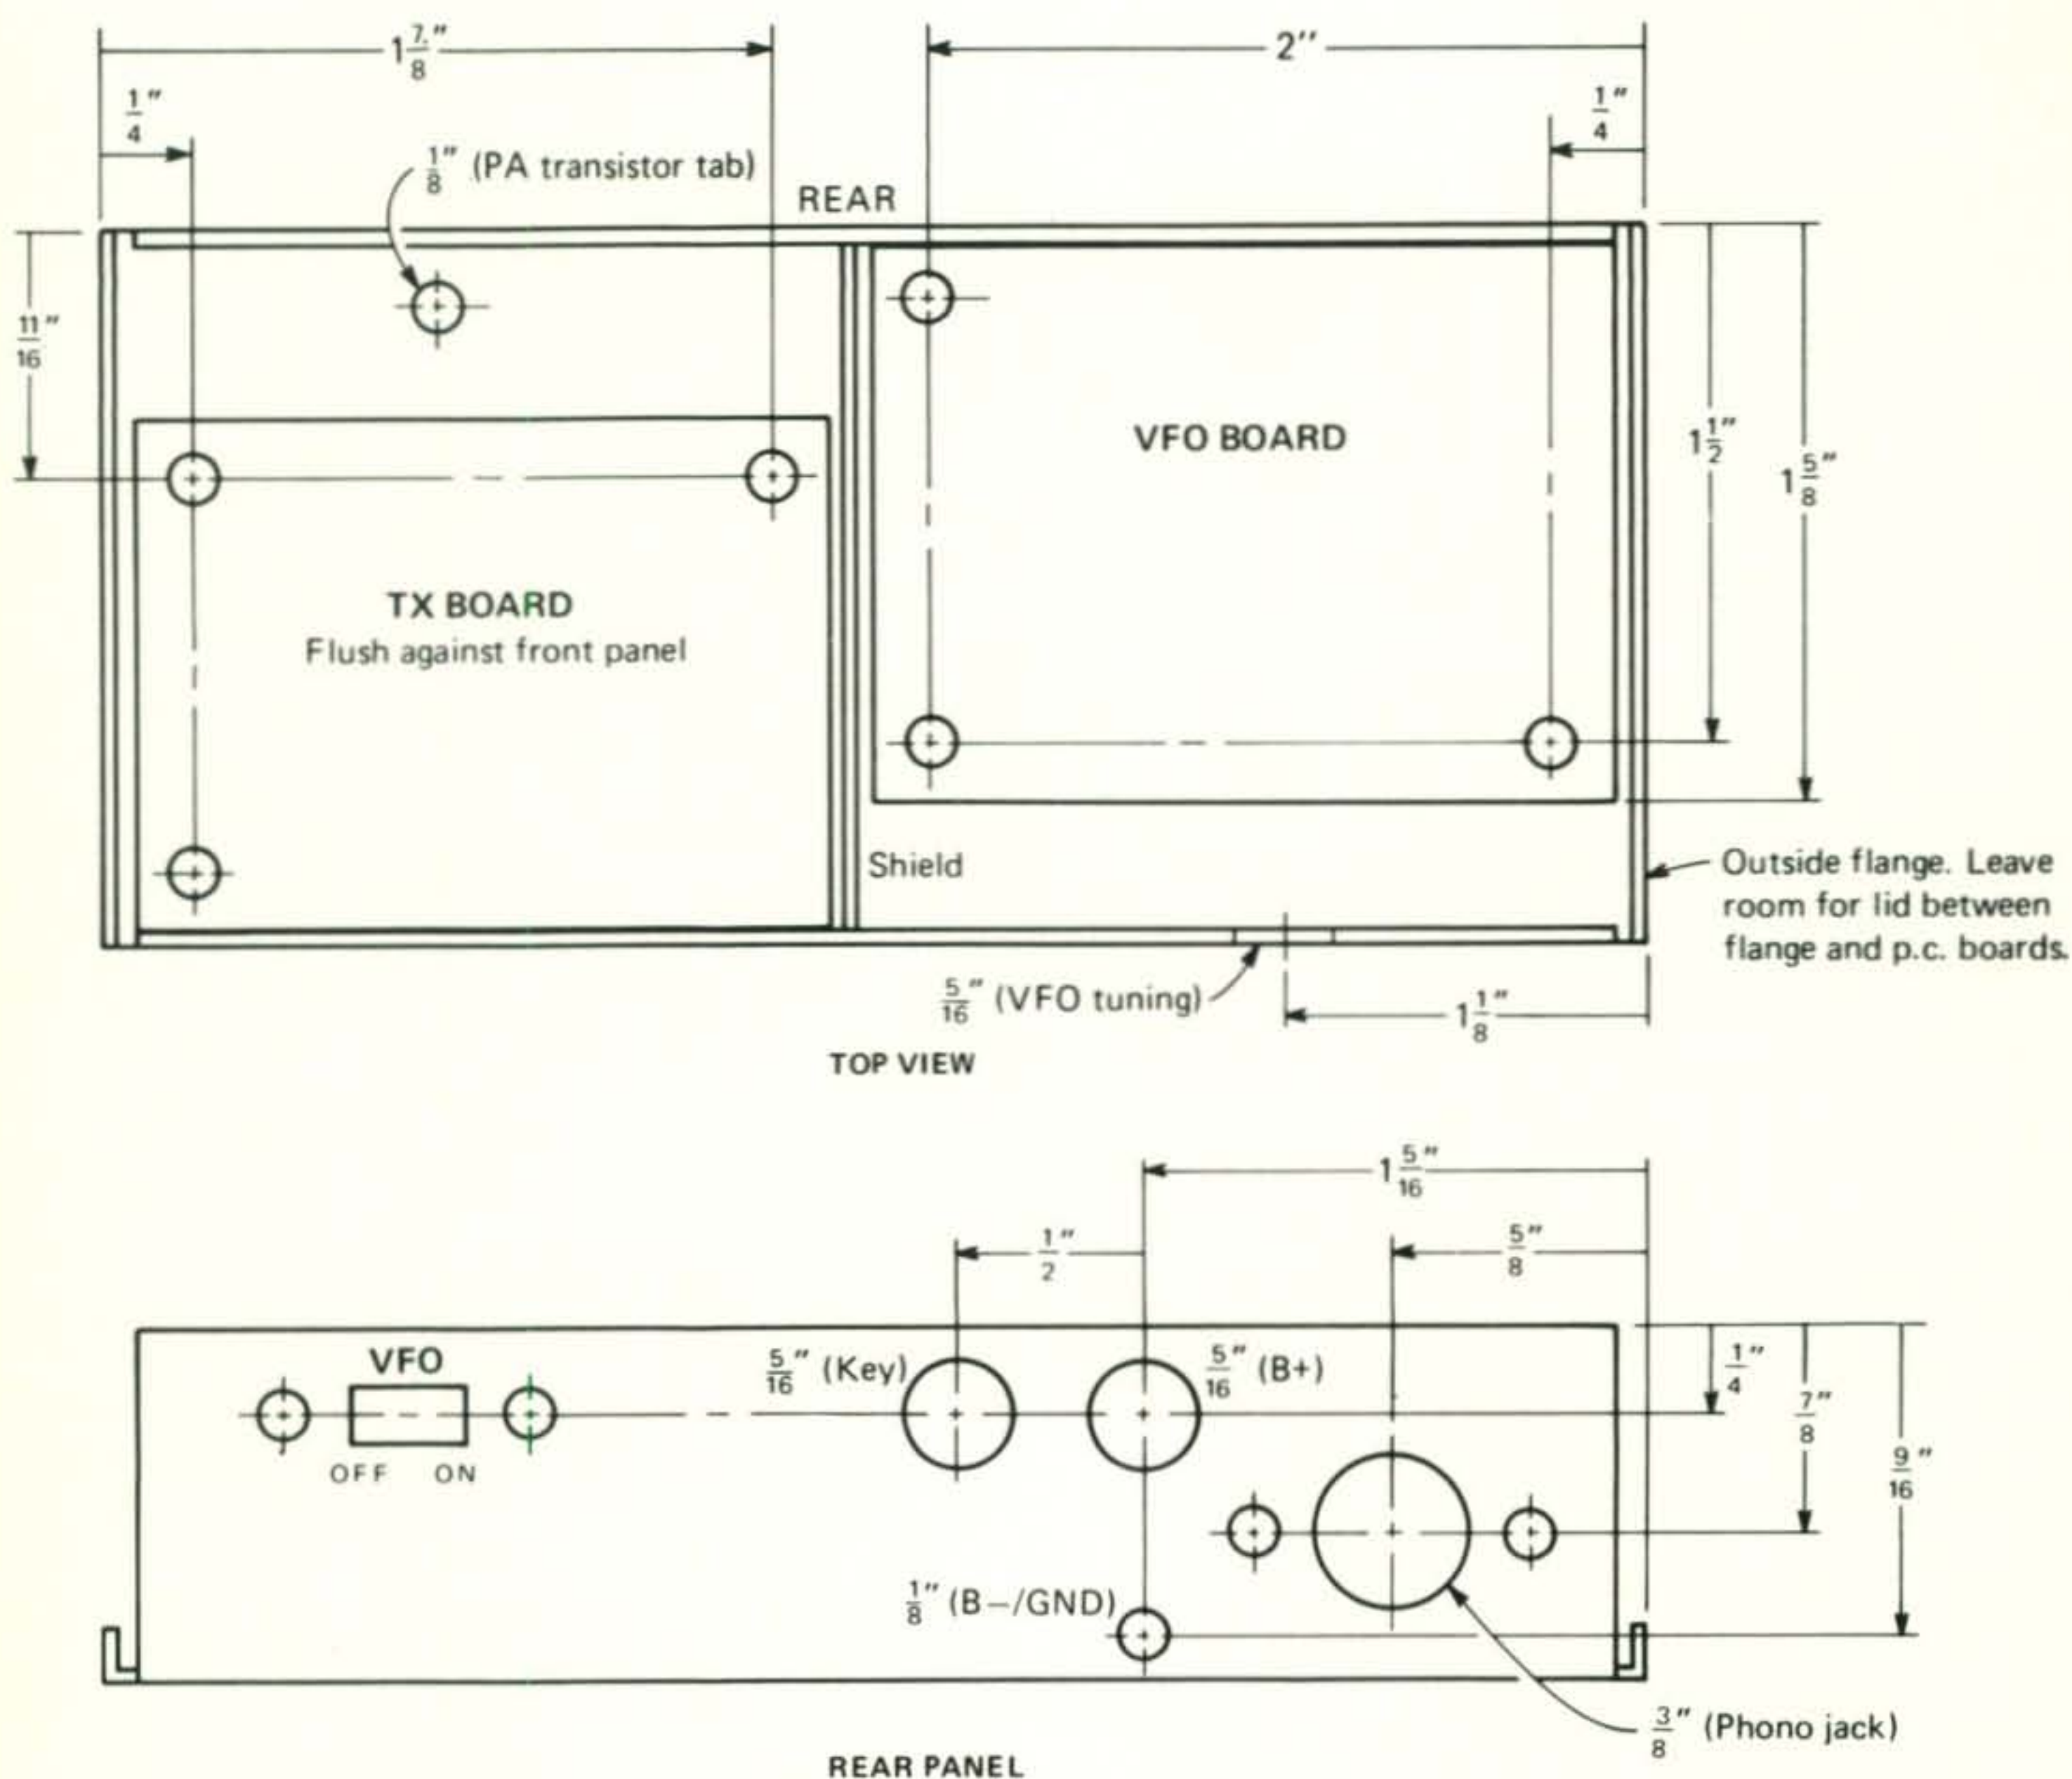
Approximate dimensions for mounting components, and transmitter layout.
